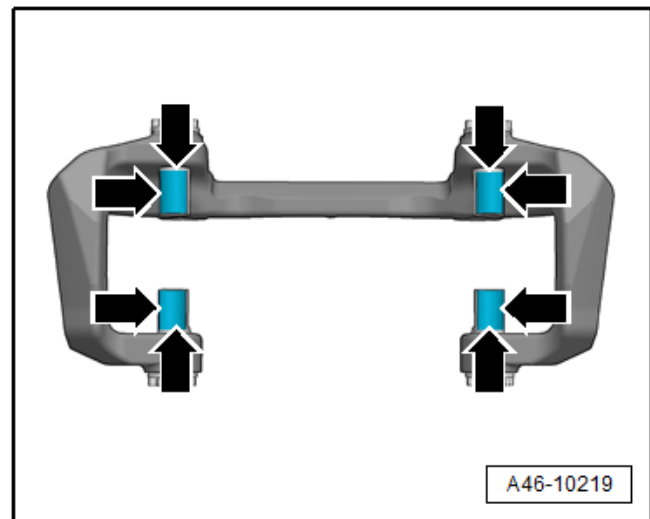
Caliper carrier guide pins with anti-seize (G 052560A2) lubricant applied where the pads make contact.
